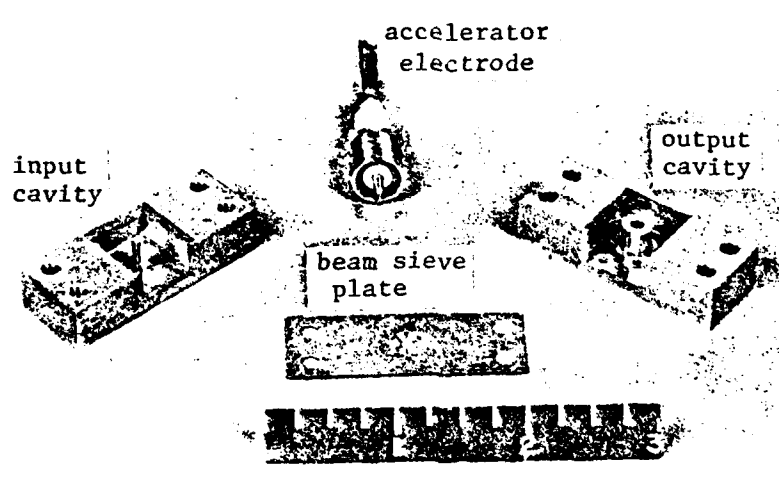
View of Internal Components of 5 GHz Prototype Tube
